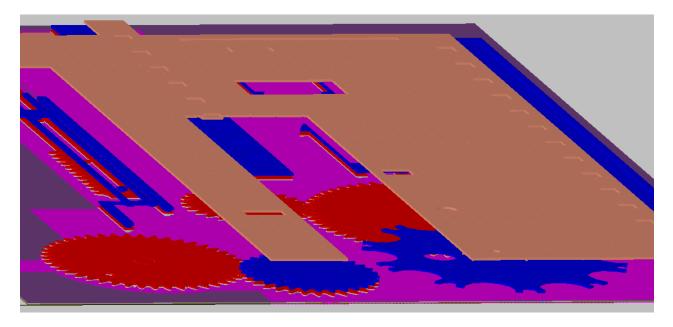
Microsaw with top portion of slider cut out to show inner gear train and latching mechanism.
